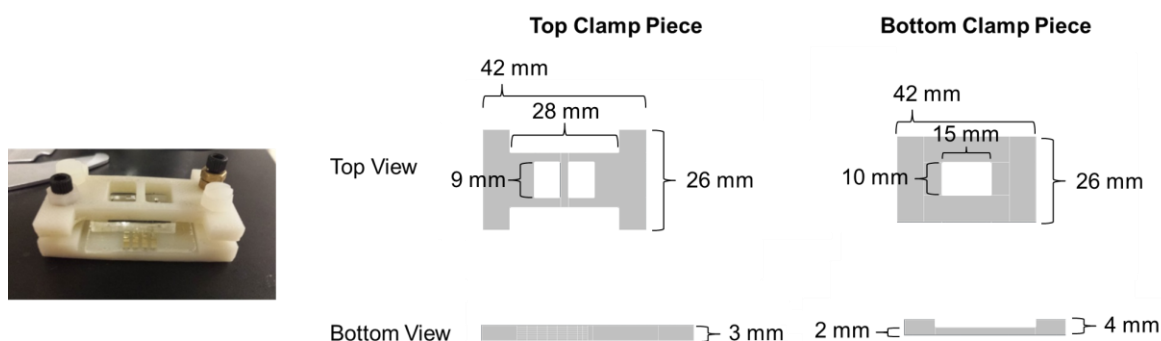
Device clamp design. The clamp used to attach PDMS molds to glass substrates (left). The top and bottom view of the top (middle) and bottom (right) of the clamp are shown with dimensions shown in millimeters.
